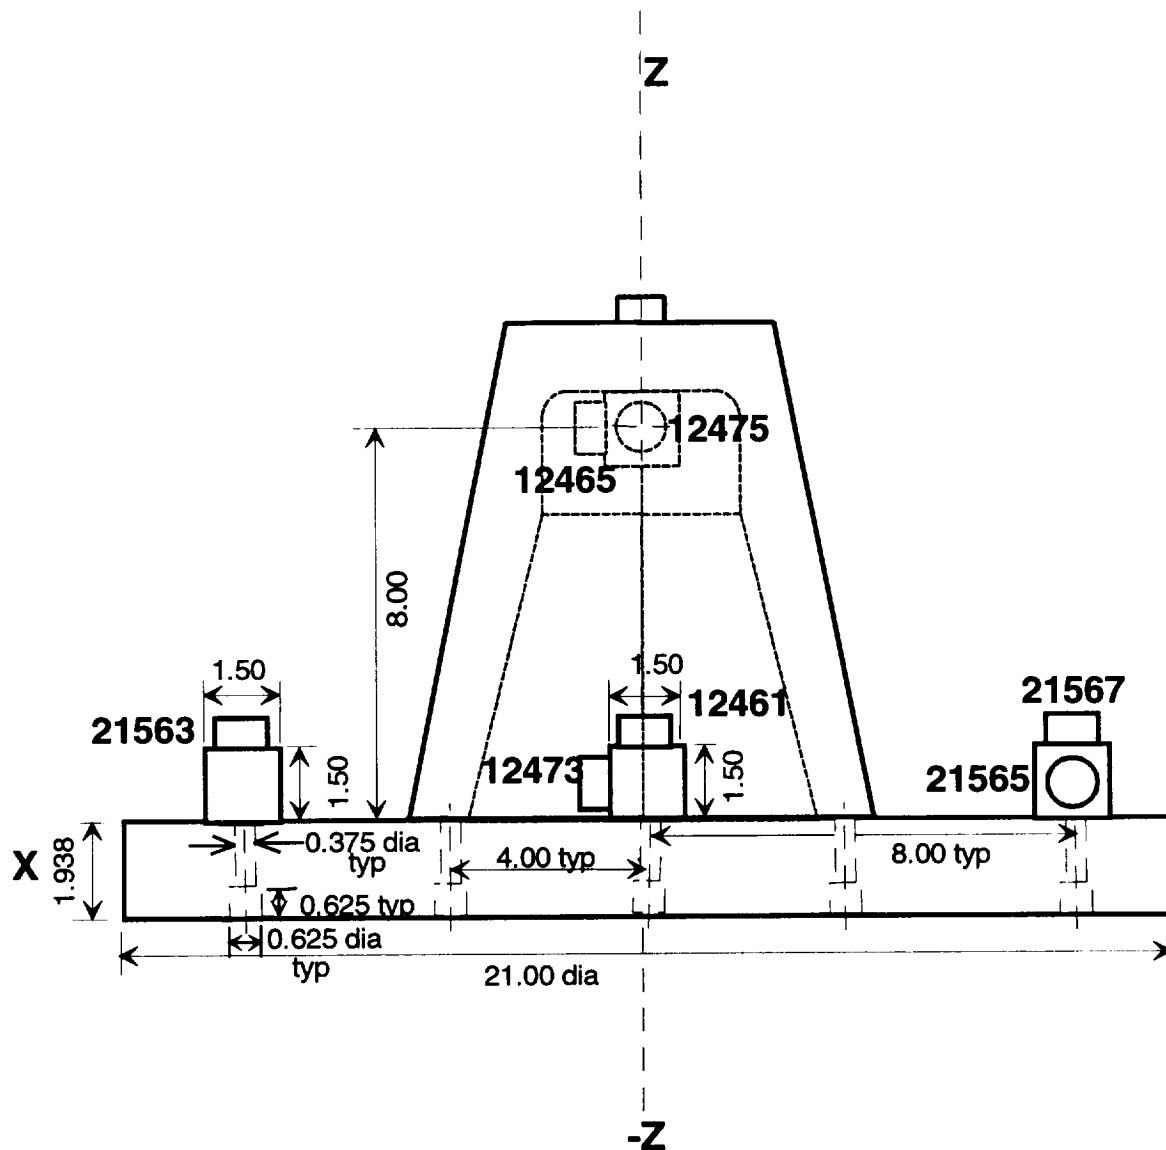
Detailed Drawing of Test Apparatus Platform with Accelerometers
